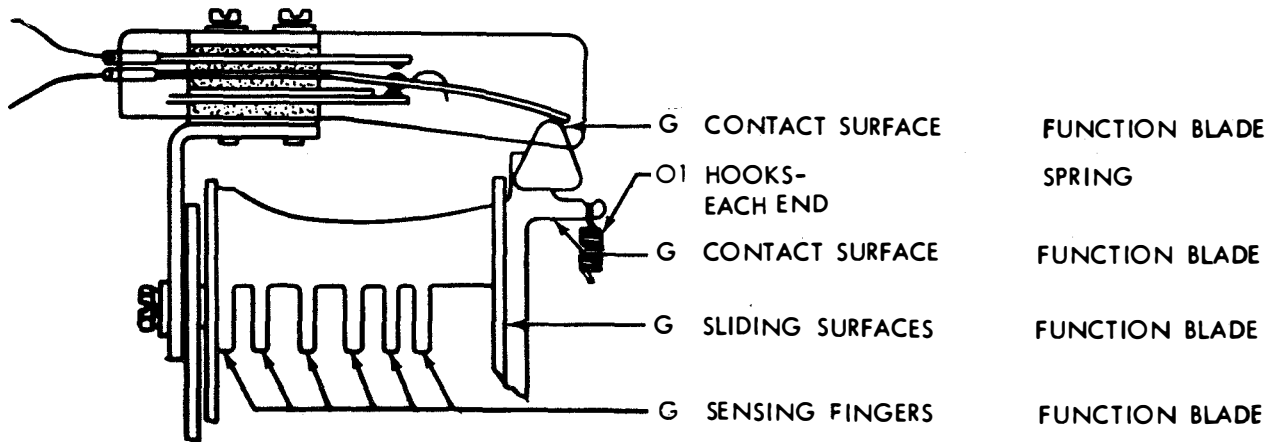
Signal Bell Contact Mechanism, Right Side View
